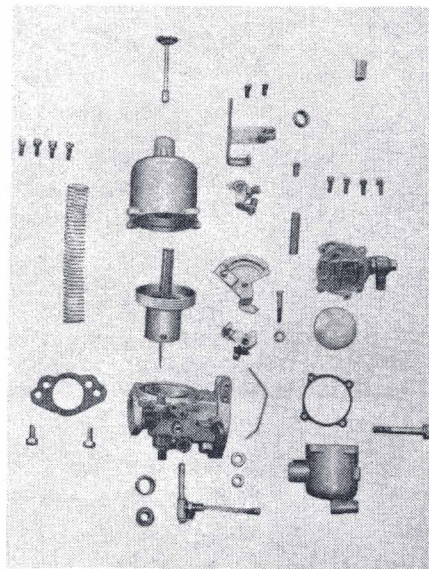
Knock Down of Suction Piston & Suction Chamber
